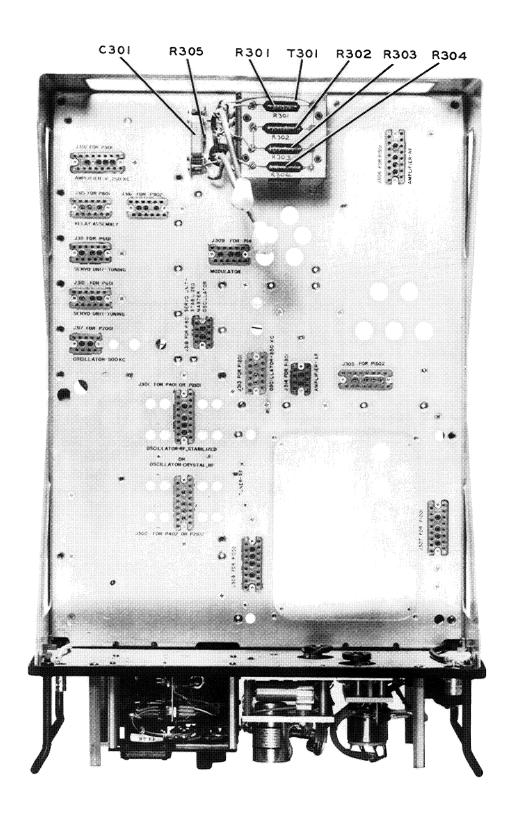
Transceiver 618S-1, Main Chassis and Front Panel, Top View
